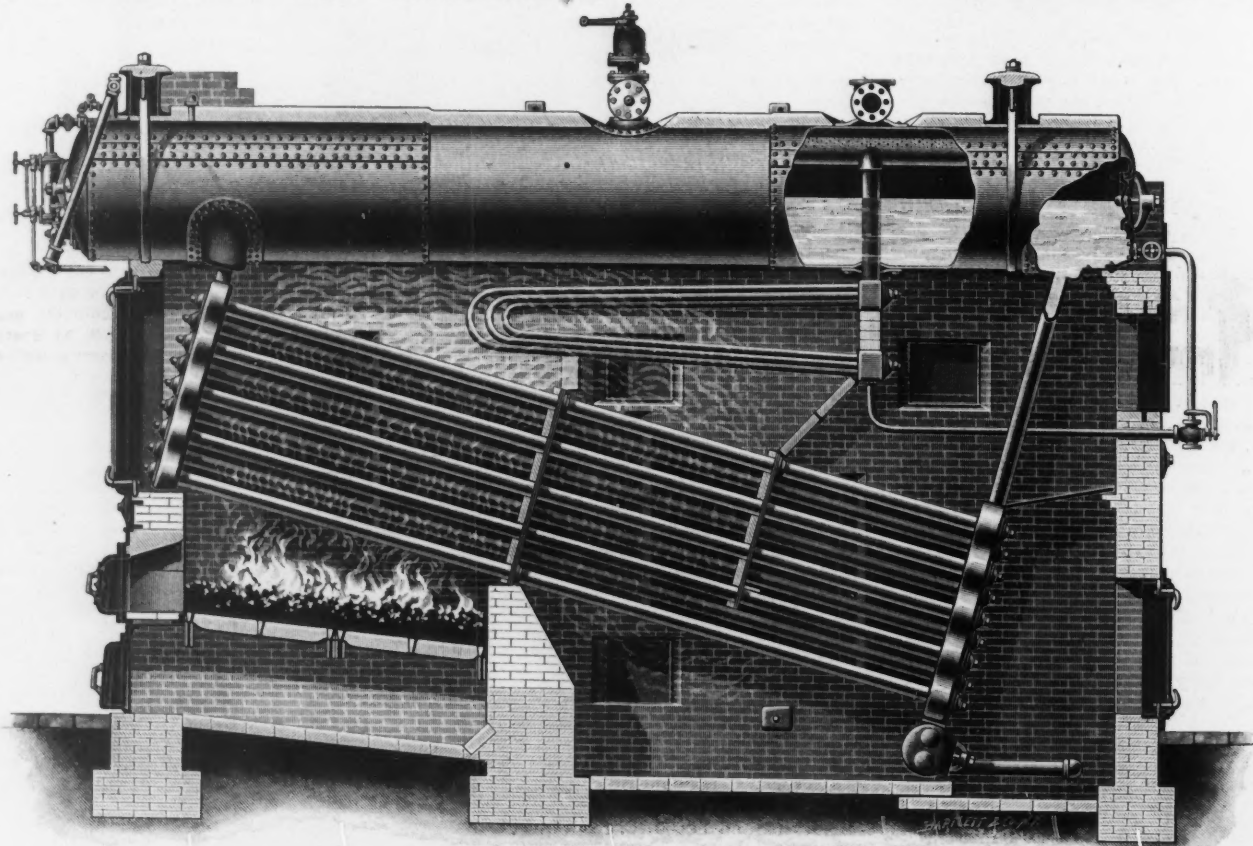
SECTIONAL ELEVATION OF BABCOCK & WILCOX BOILER, WITH STEAM SUPERHEATER ATTACHMENT.
